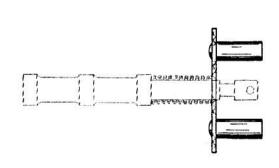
EXTRACTOR FOR BEVEL PINION SHAFT FRONT BEARING
